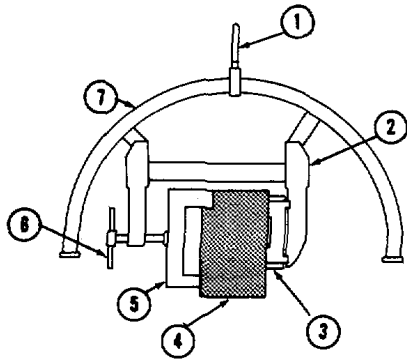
(N10278) ST-1179 Injector sleeve holding tool
